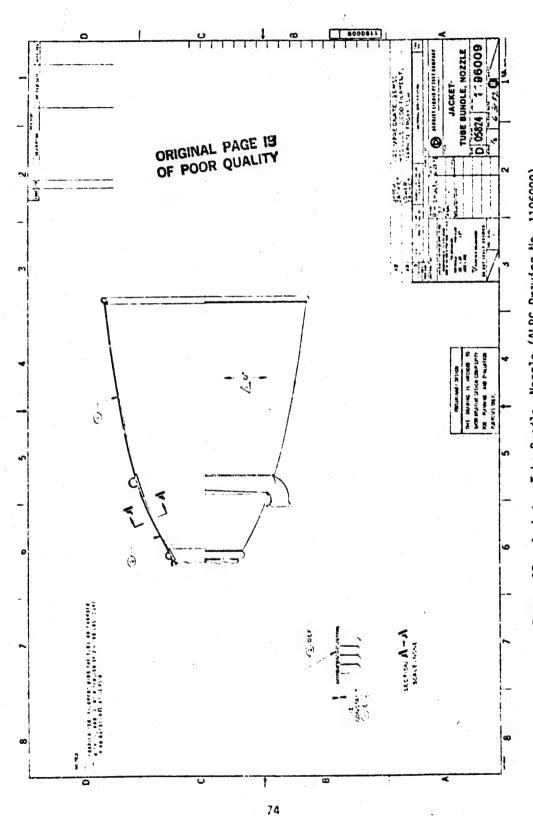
Jacket - Tube Bundle, Nozzle (ALRC Drawing No. 1196009)
